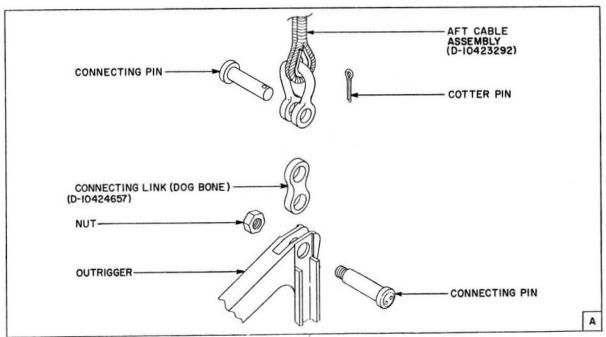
FIG. II. CONNECTING AFT CABLE ASSEMBLY
